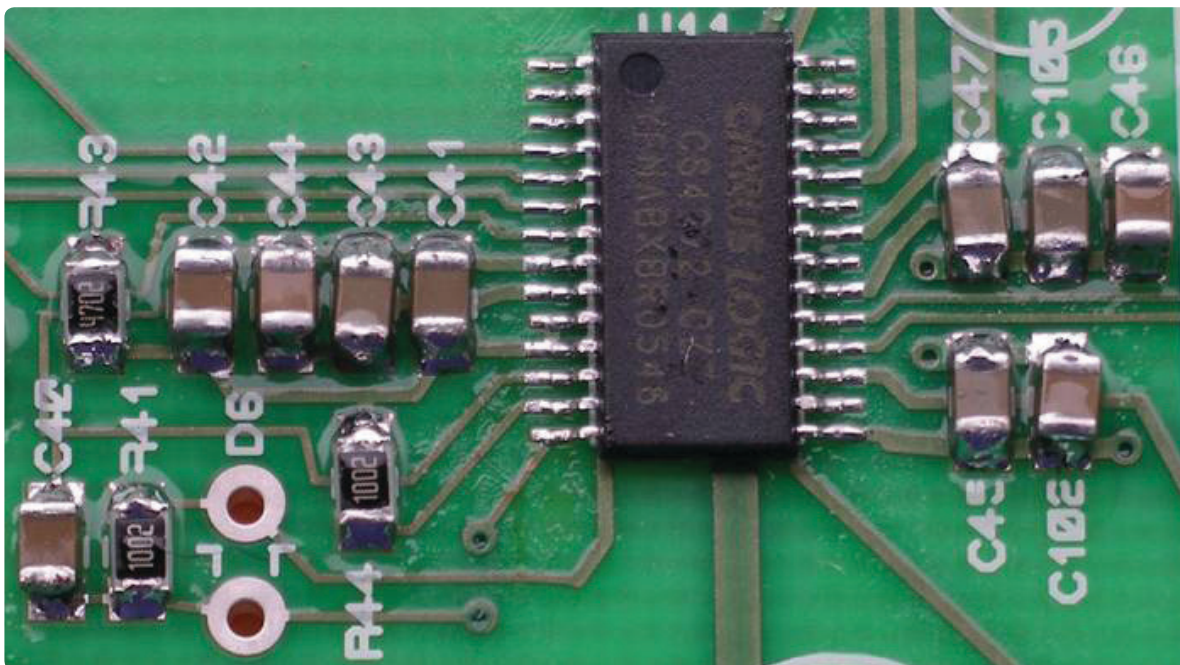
Surface-mounted technology solders components on to traces on the same side.
